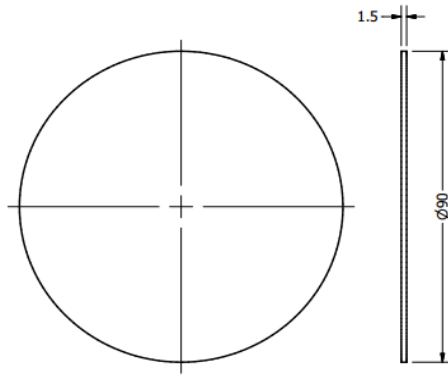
7 Drawing of the Sample with 90-mm diameter.
